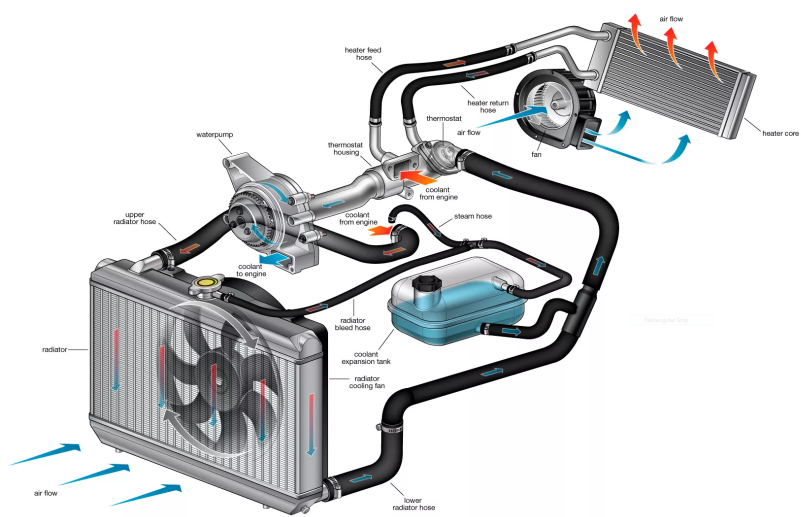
Example of a cooling system in a passenger car. Source *engineeringdiscoveries.com* [3]
